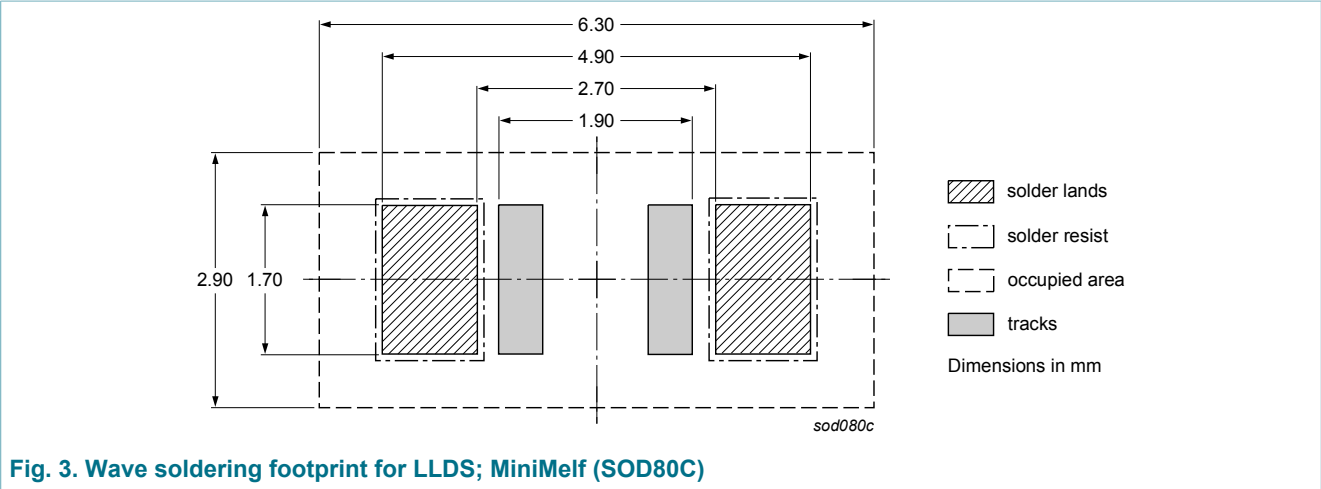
Wave soldering footprint for LLDS; MiniMelf (SOD80C)
